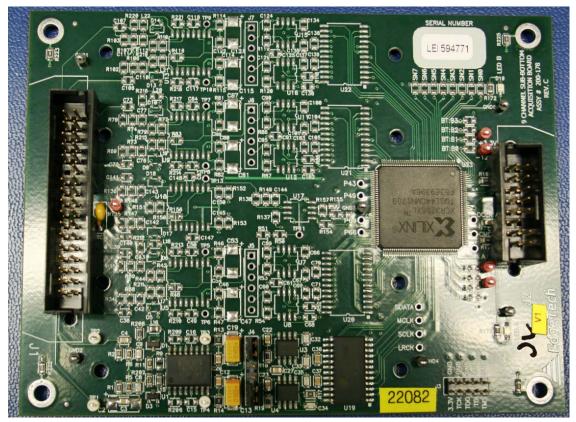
Tiger Board Set: Acquisition PCB - 0014231
